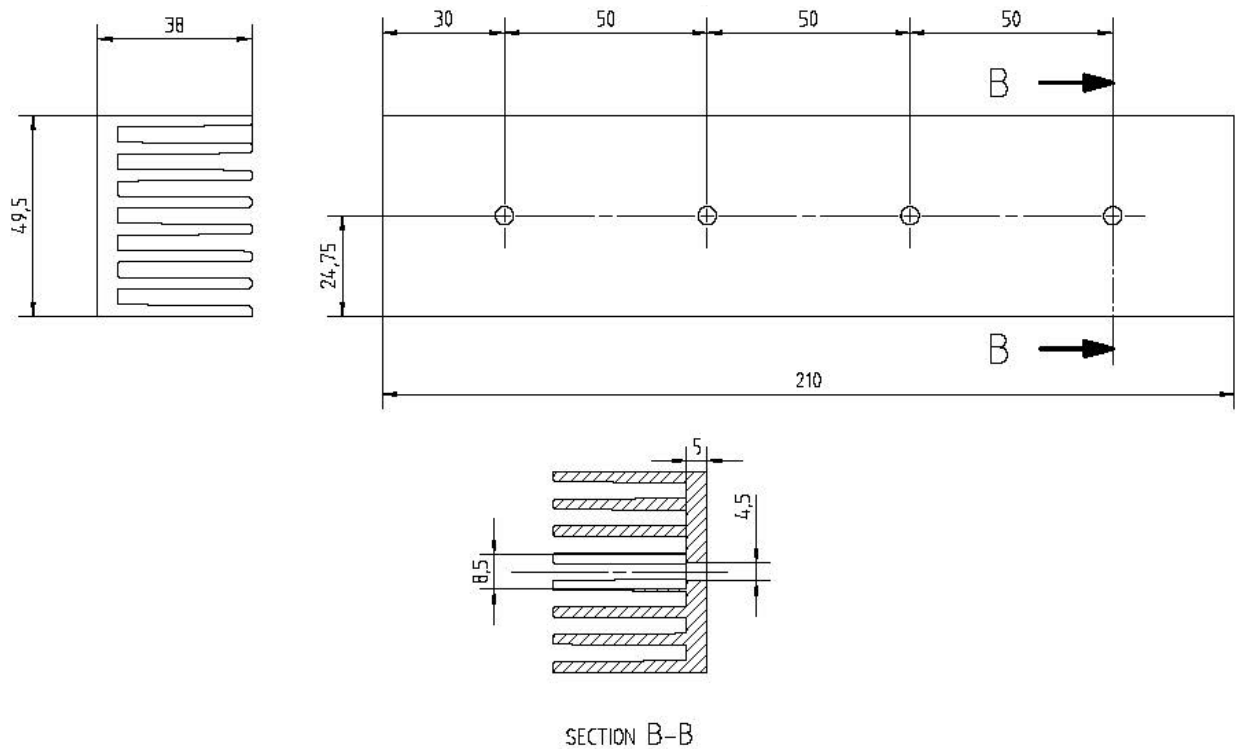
Dimensions of cooling element D3-XM 310-055, dimensions in mm
